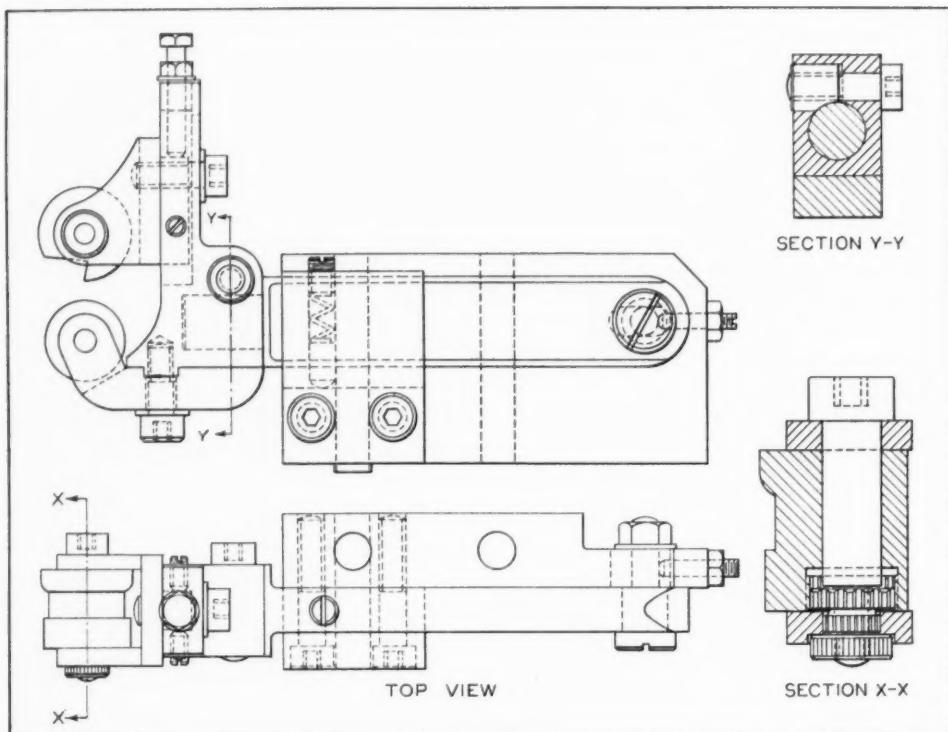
Tool and Holder Similar to One Shown in Fig. 1
